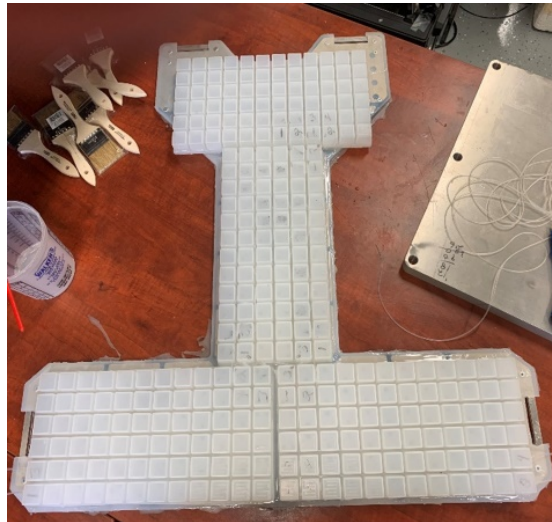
The assembling of the air pocket sections onto the breastplate structure (silicone-covered metal plates and seatbelt webbing). Four air pocket sections were used to fill the breastplate. This pouring of air pockets in sections sped up the building and modification of the breastplate. Sections were connected via silicone air lines to create one continuous flow of air
